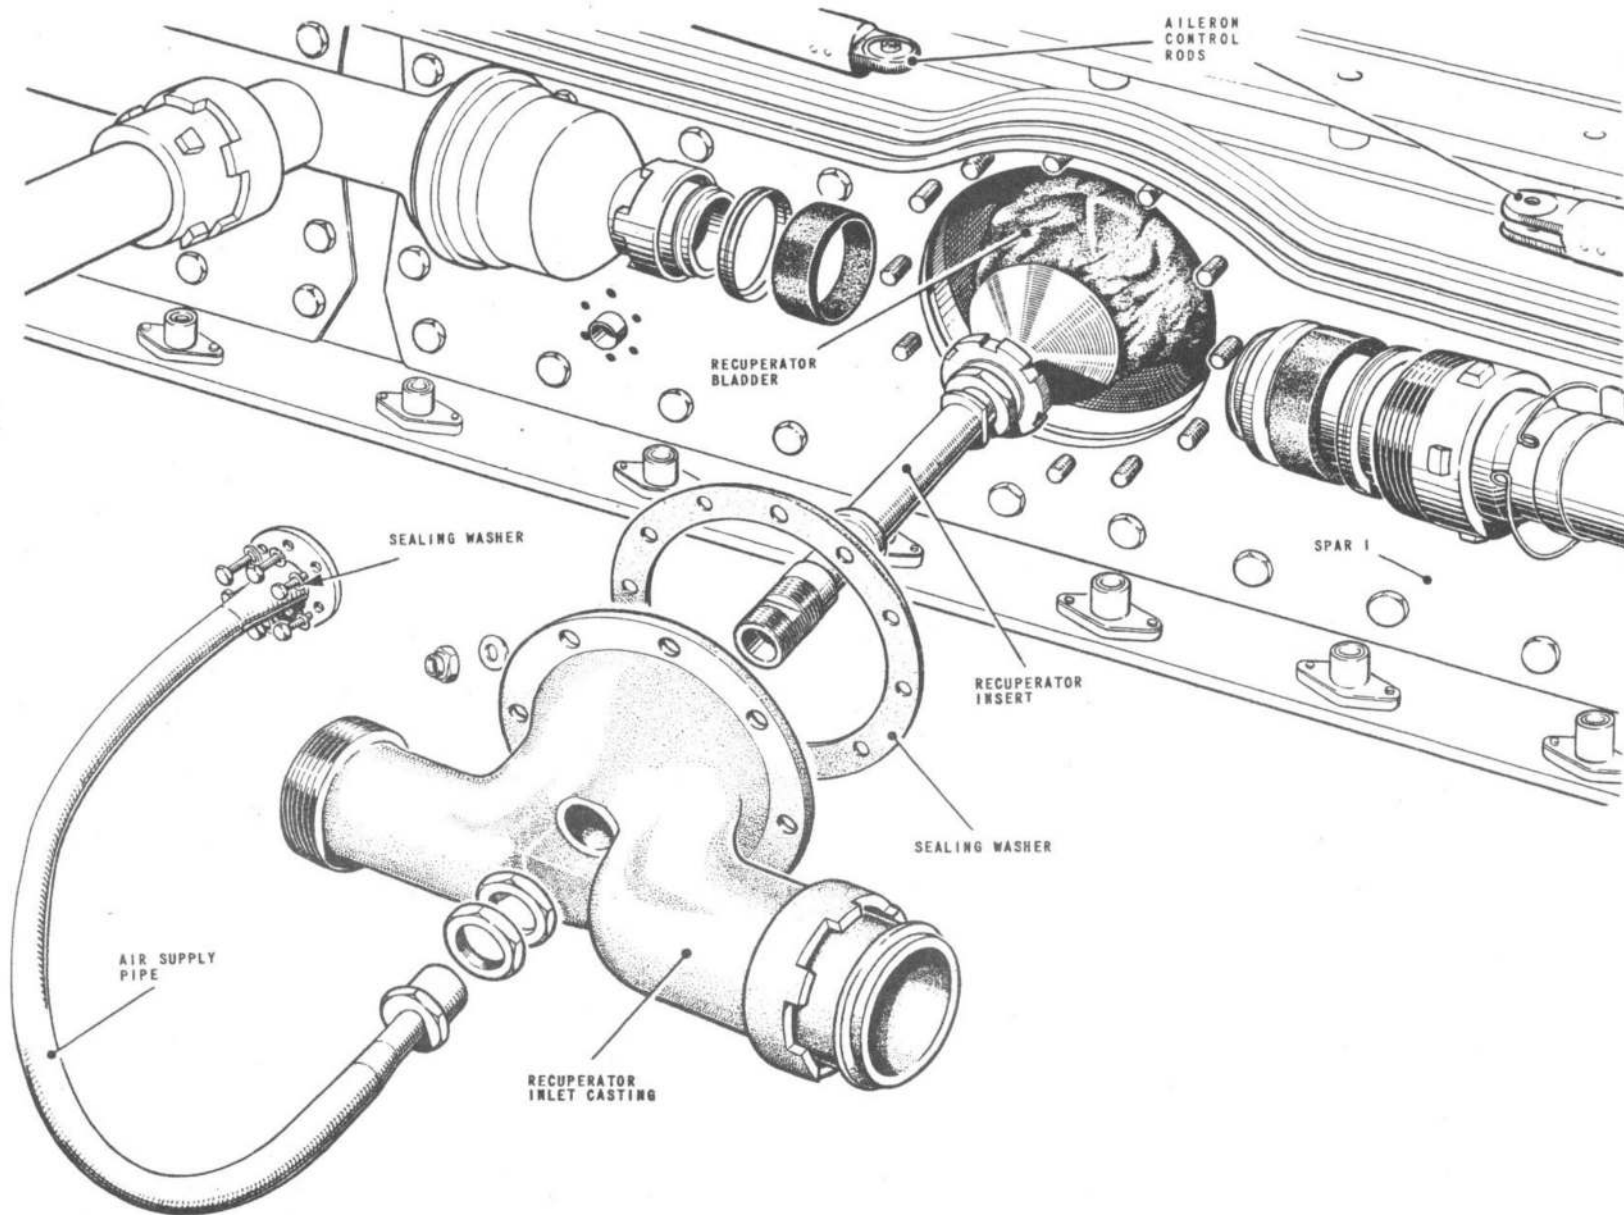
RECUPERATOR BLADDER - REMOVAL AND ASSEMBLY
